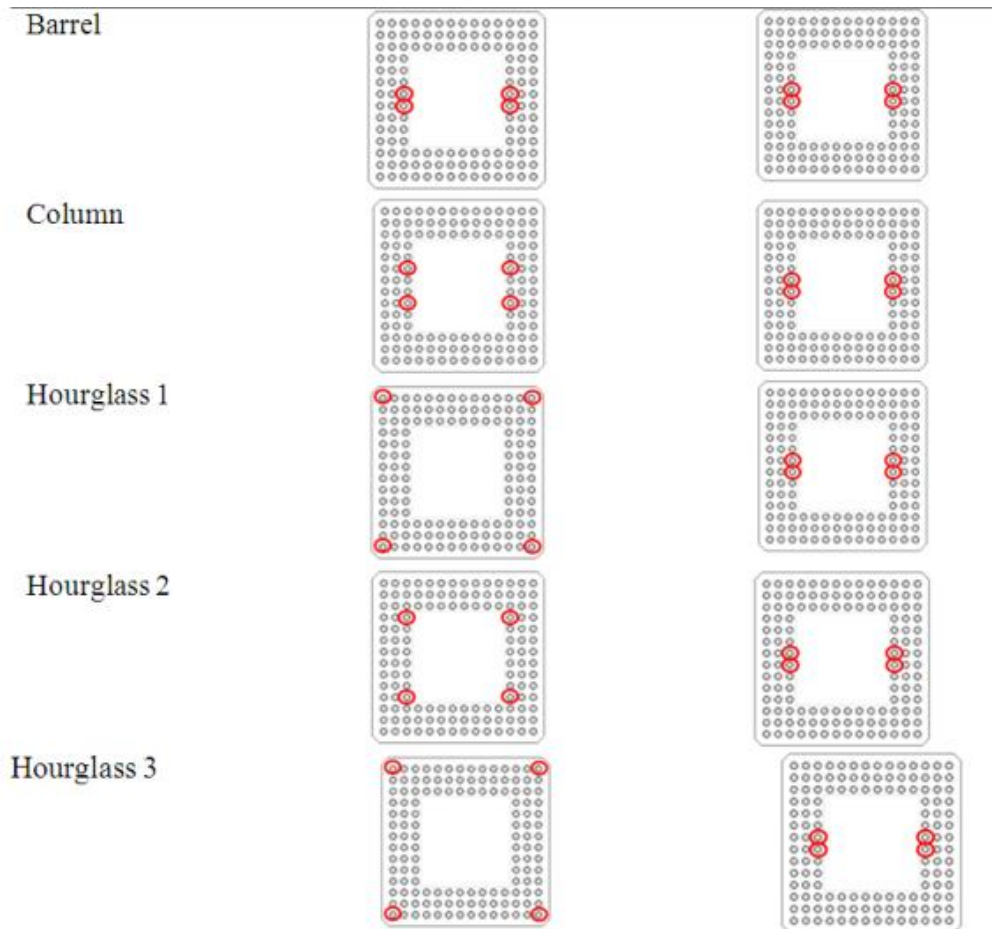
Typical locations of Critically Affected Solder Joints on FPCB and RPCB [2]
